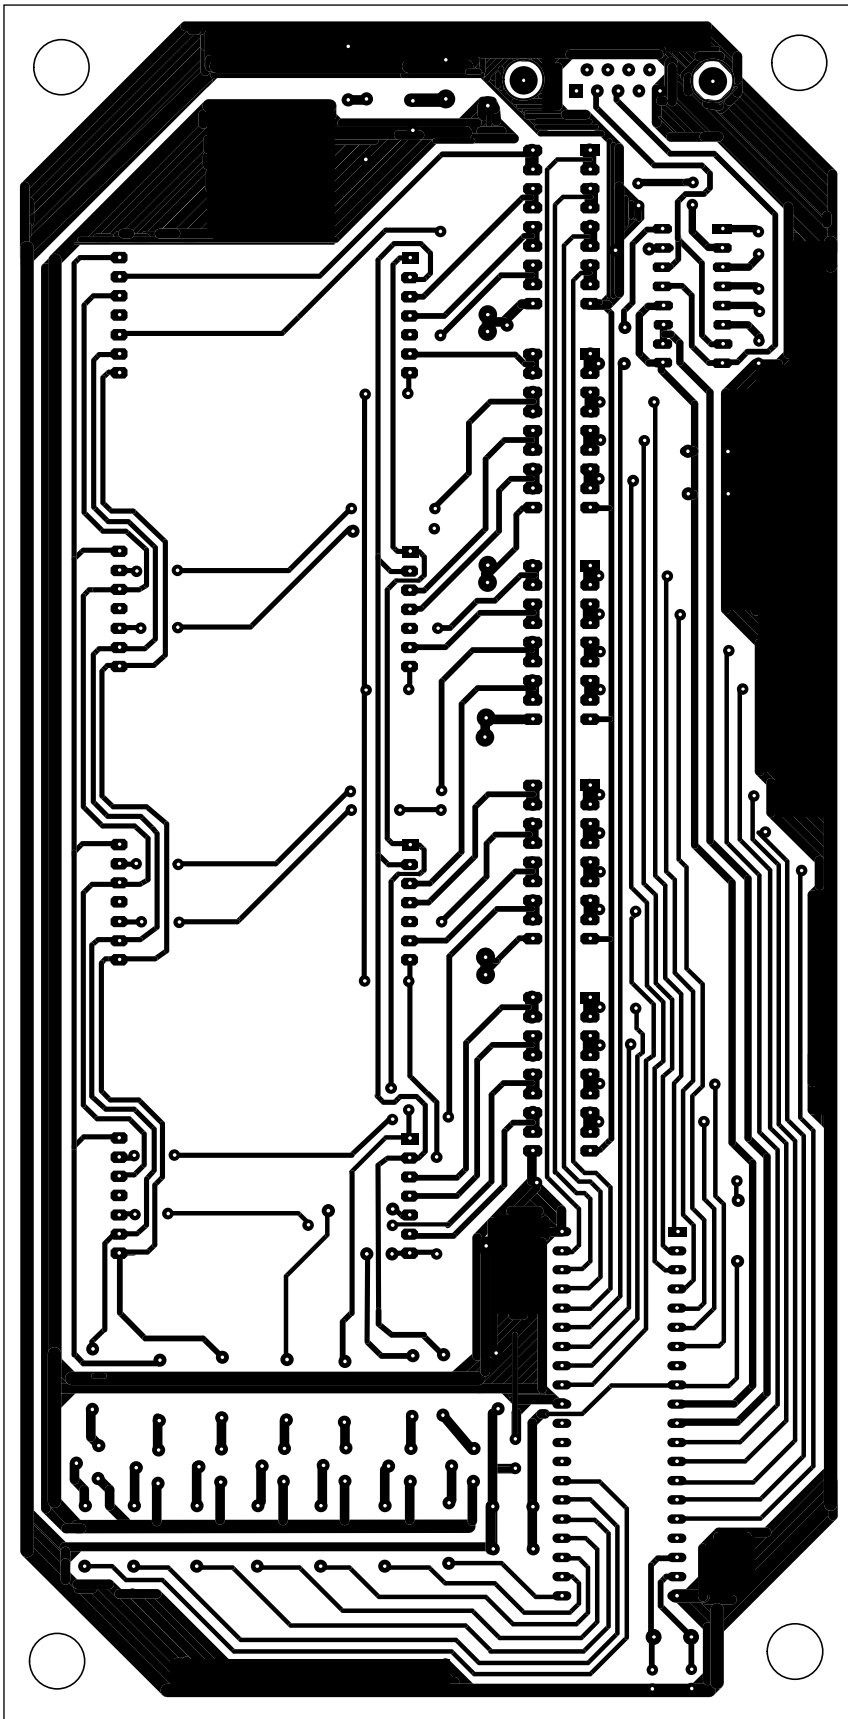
Combined actual-size, single-side PCB layout for Figs 2 and 3
